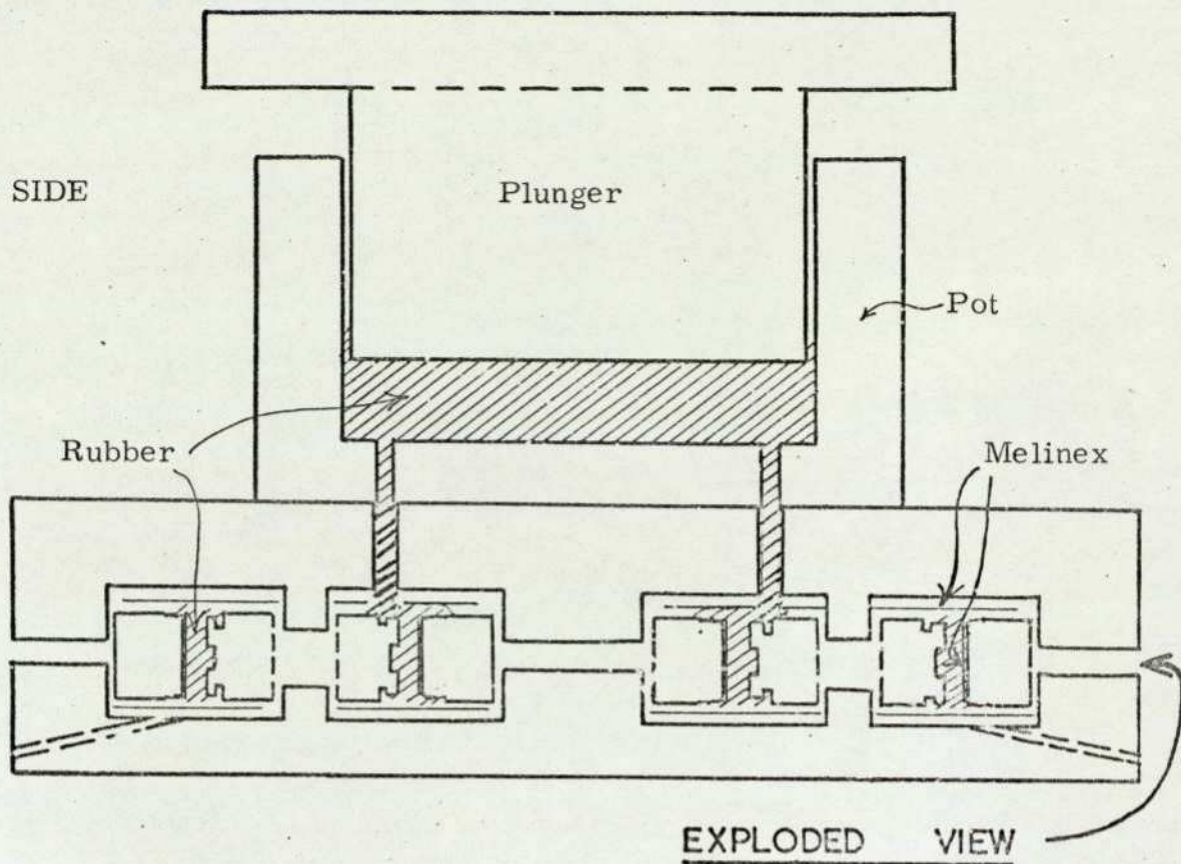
Transfer mould for producing Rotary Tackmeter testpieces.
